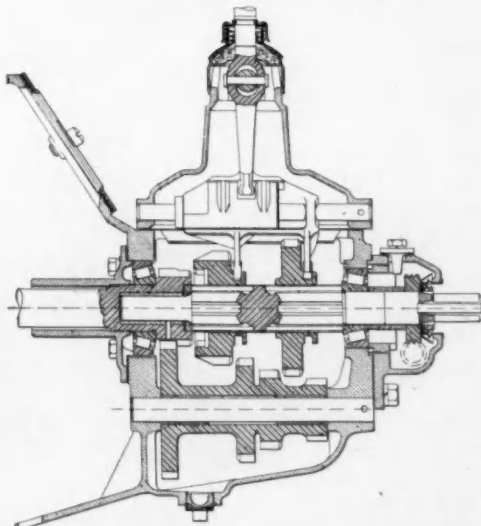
WHIPPET THREE-SPEED DESIGN INCORPORATING TAPER ROLLER-BEARINGS ON THE MAIN SHAFT
